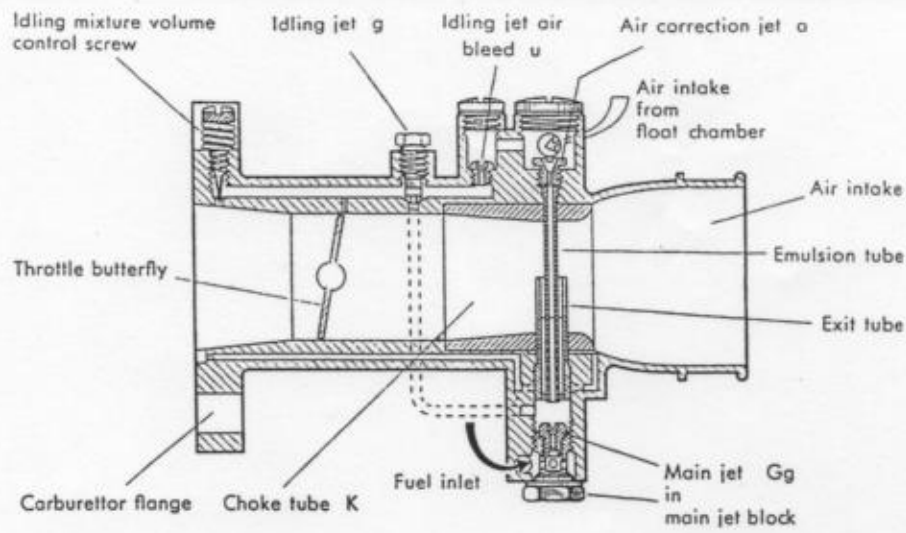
HR Downdraught Carburettor – Schematic Section through Bore
